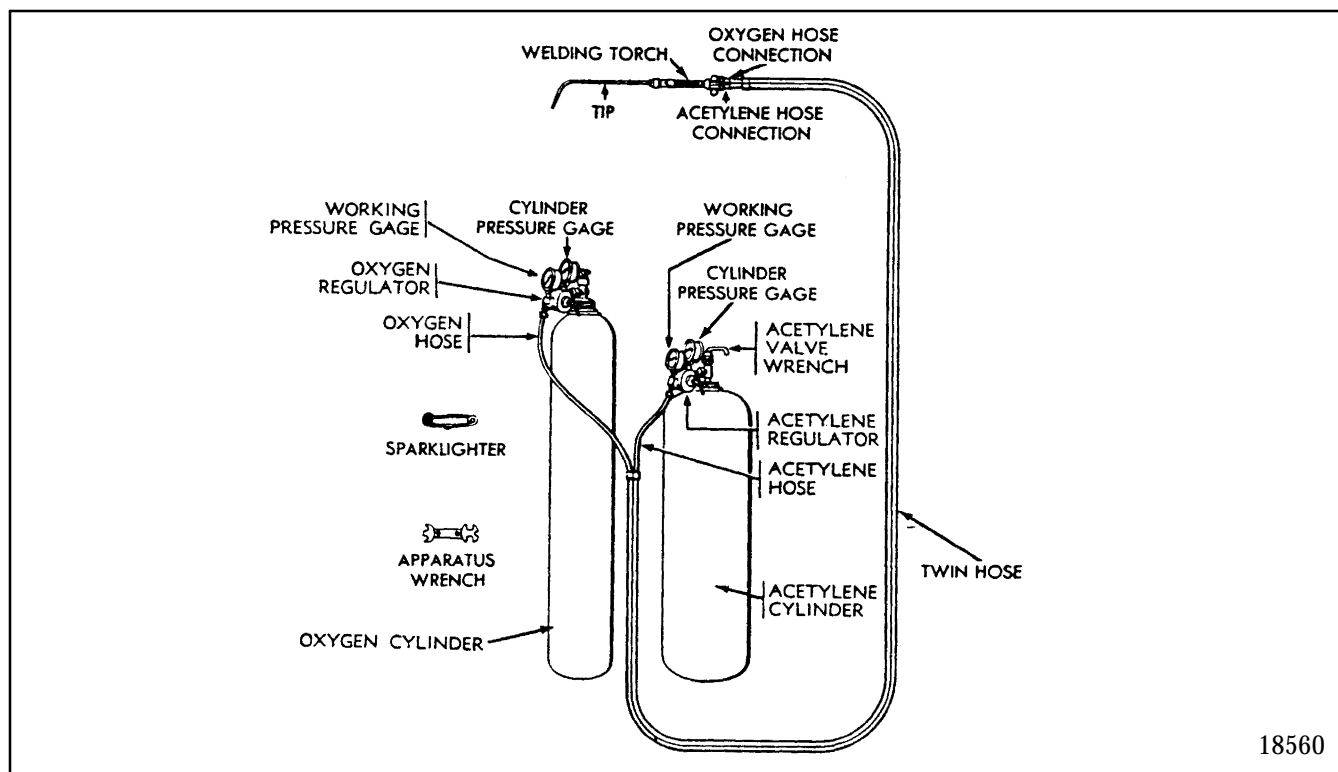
Portable Oxyacetylene Welding and Cutting Equipment
